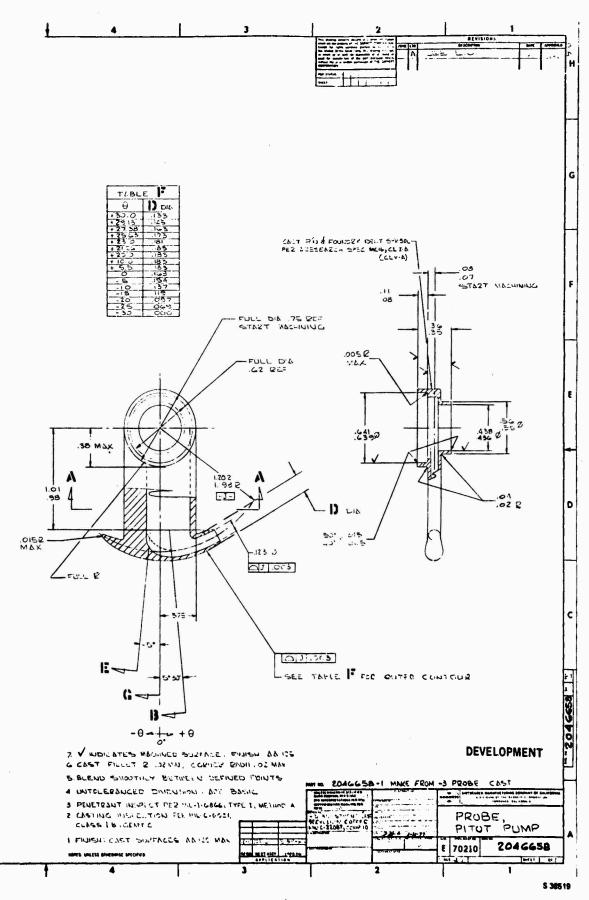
Pitot Pump Probe Assembly, 2046658 (Sheet 2)
